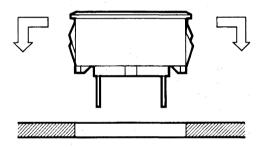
Installation of the Light Bar/Panel Mount Assembly into a Front Panel.
